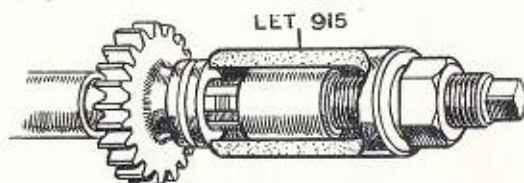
Service Tool No. LET 915 pressing timing pinion on driving shaft.
